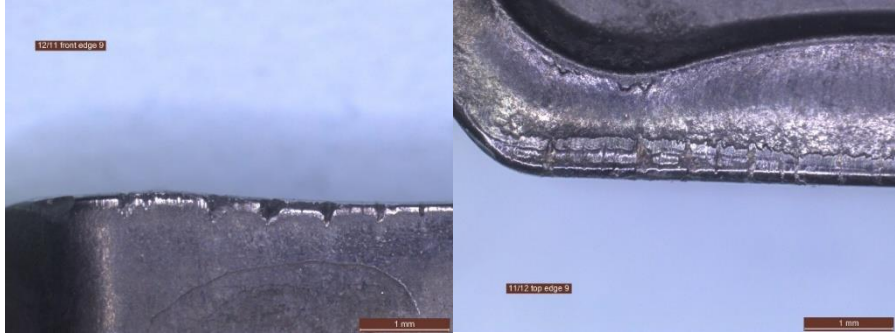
Example of a cutting edge with tool wear degree 1. Incipient thermal cracks on a cutting edge can be seen.
